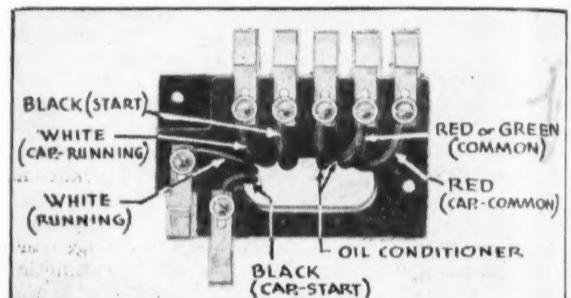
Top view of base plate for DR-3 machine with Type E control.
